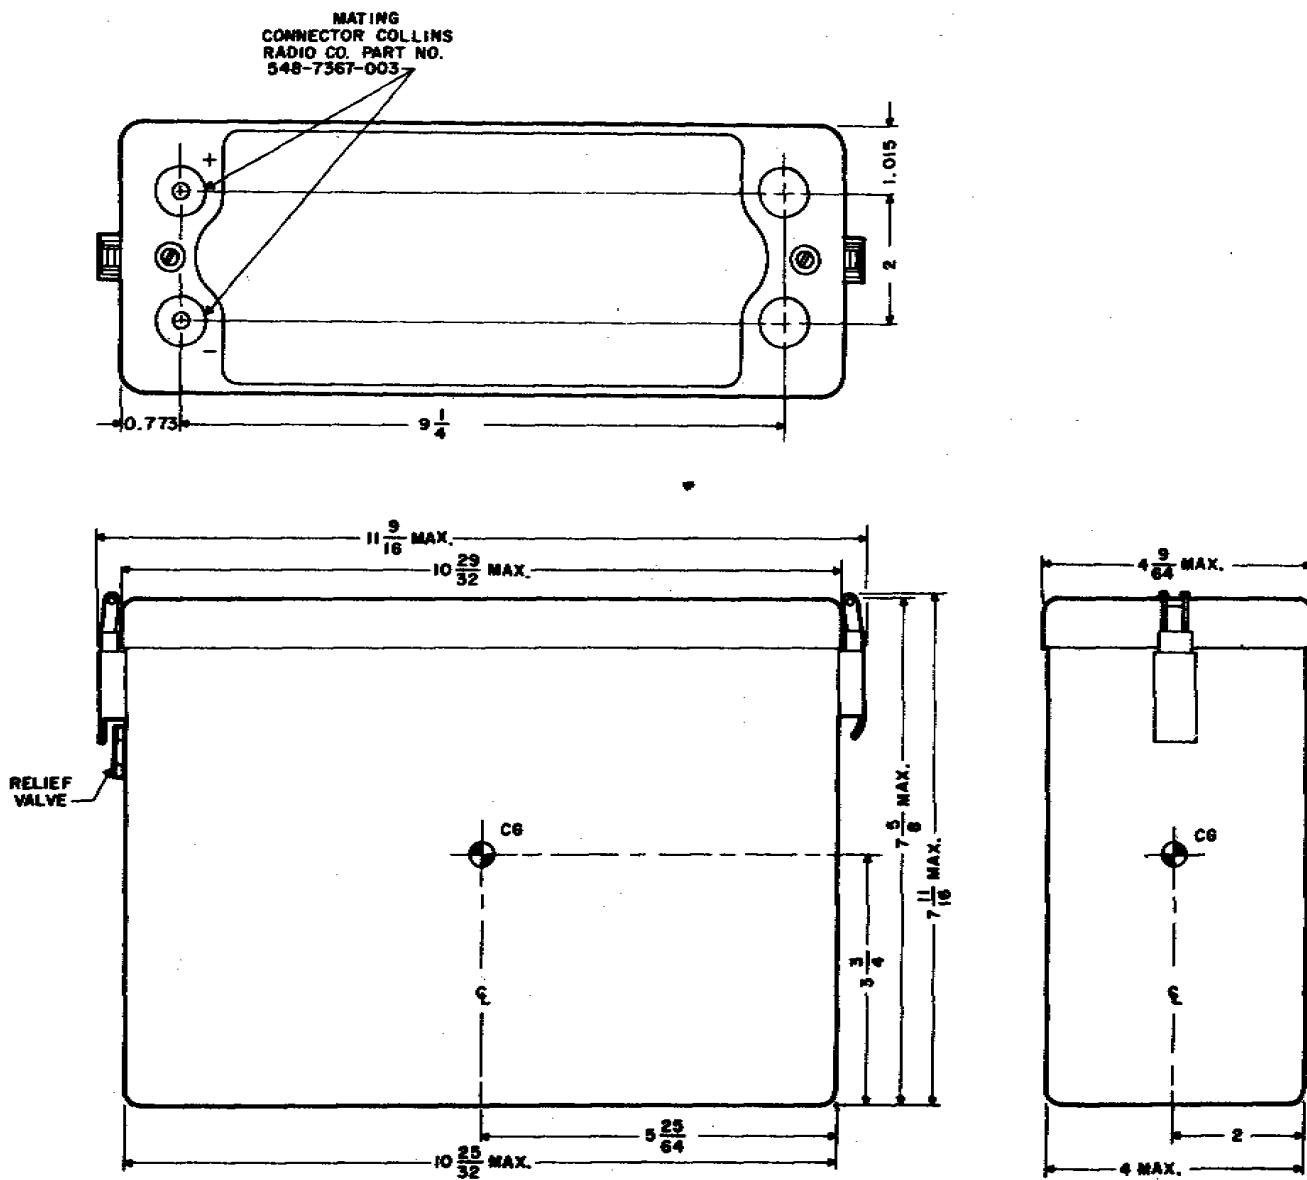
Storage Battery BB-451/U, Outline and Mounting Dimensions
